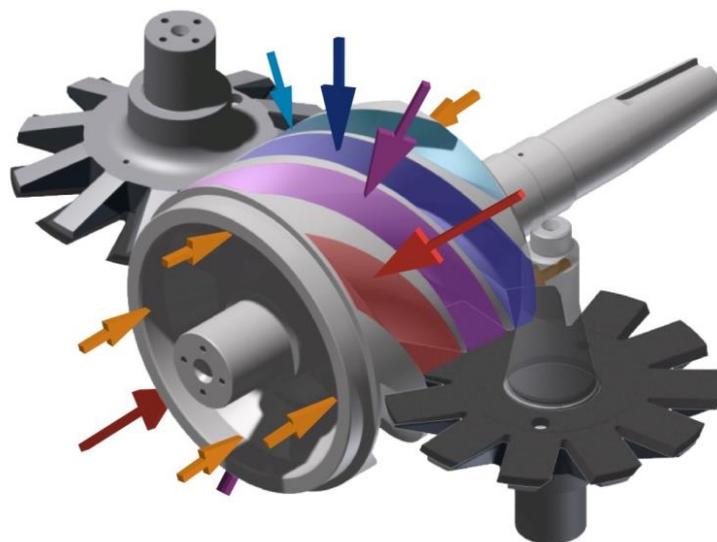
Balanced Axial and Radial Thrust Loads on Single Screw Rotors
